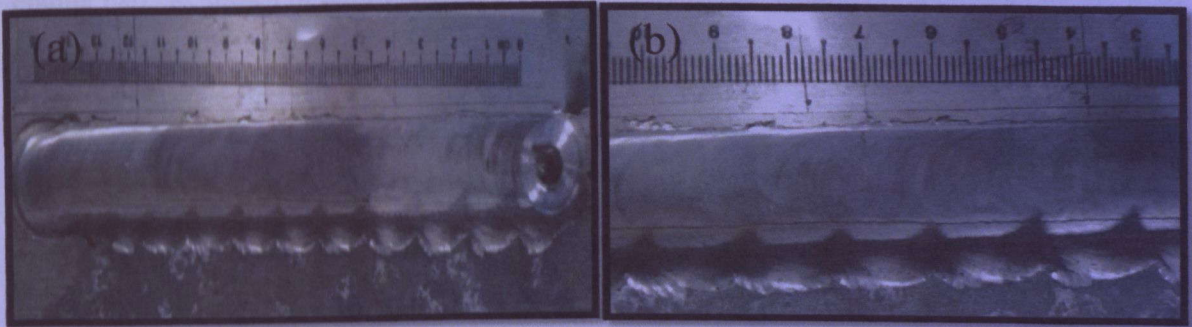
FSW weld surface in configuration 1: (a) Splash at retreating side (b) Smooth weld surface
